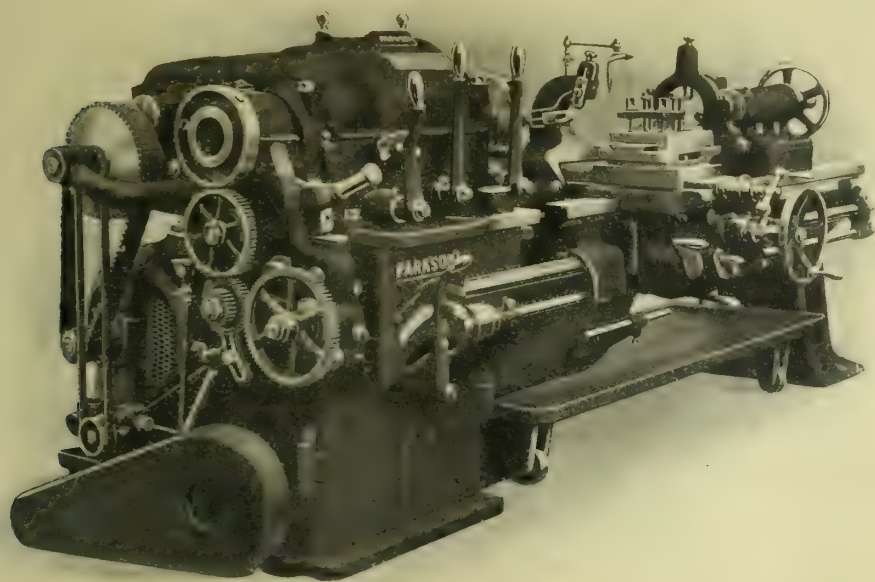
9IN. CENTRE "PARKSON" LATHE WITH MOTOR DRIVE.
